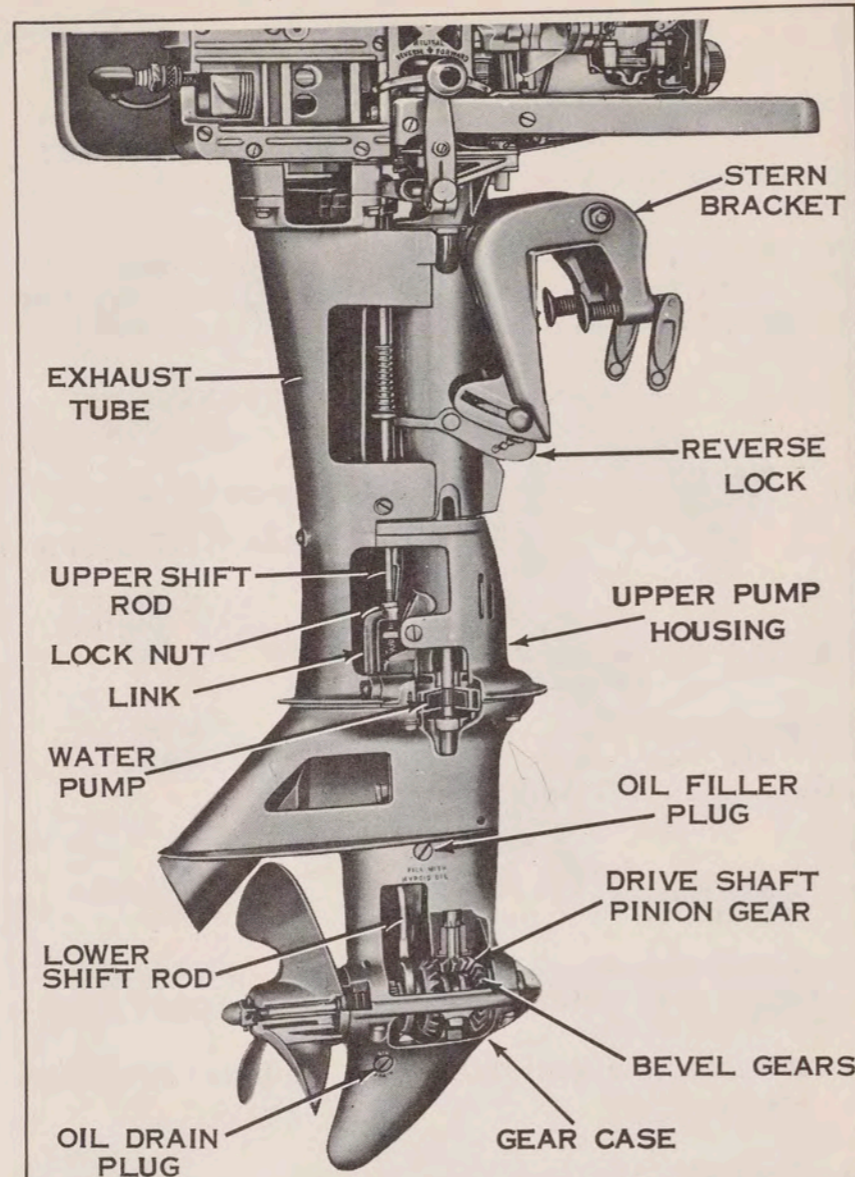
Cutaway of Model 12D10 Lower Unit
